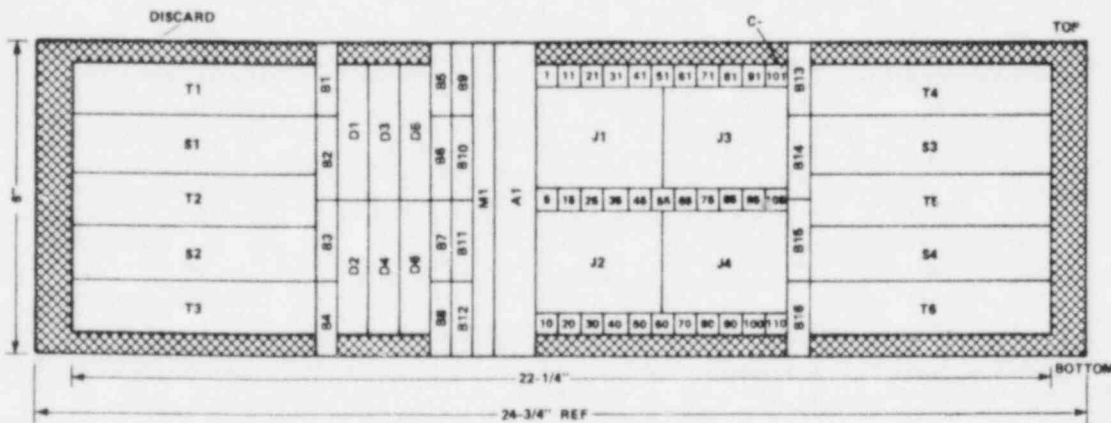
Side-View Weld V842 Cutting Diagram
